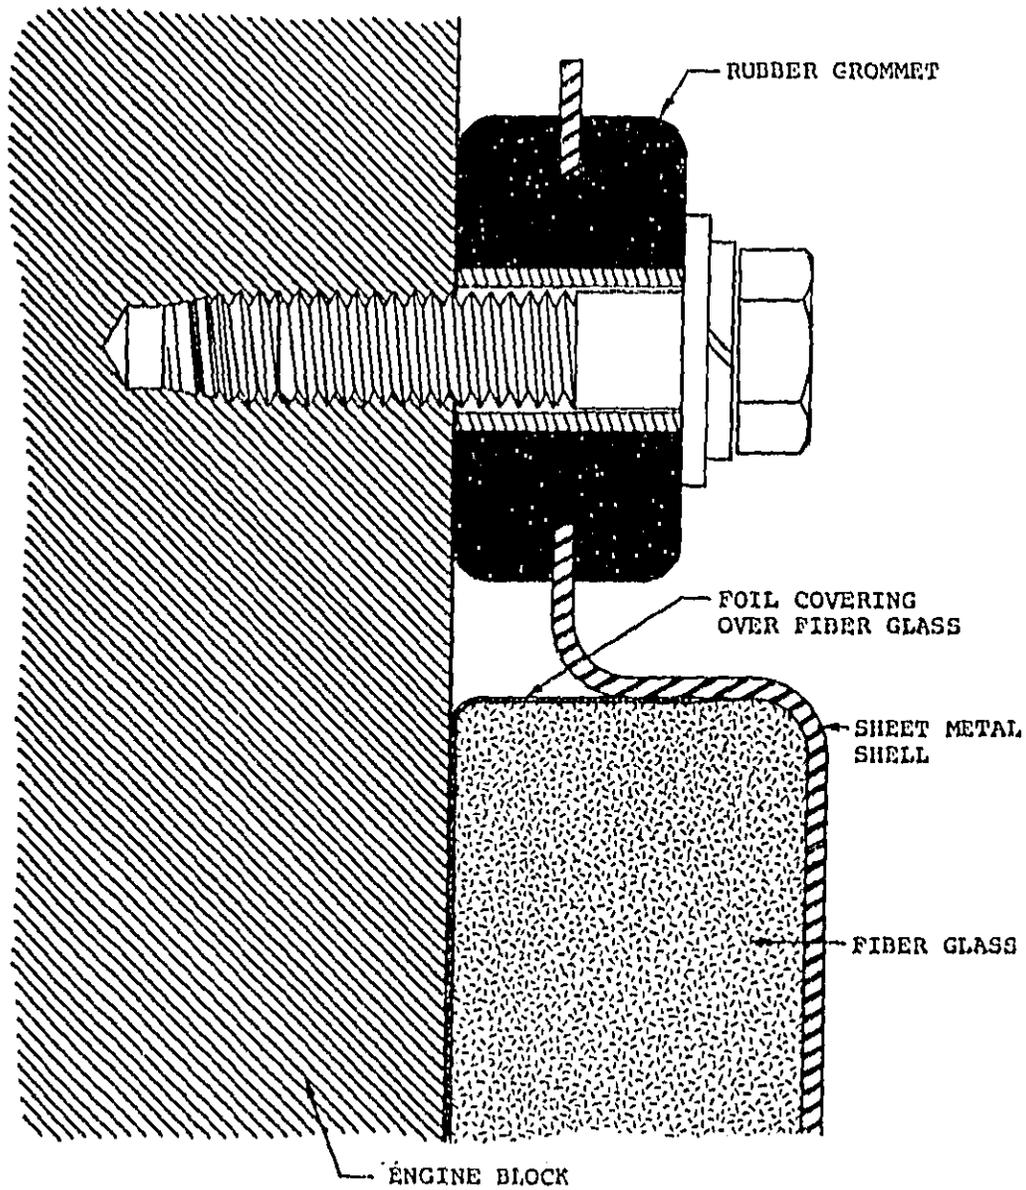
ILLUSTRATION OF AN ENGINE COMPONENT SHIELDING COVER
